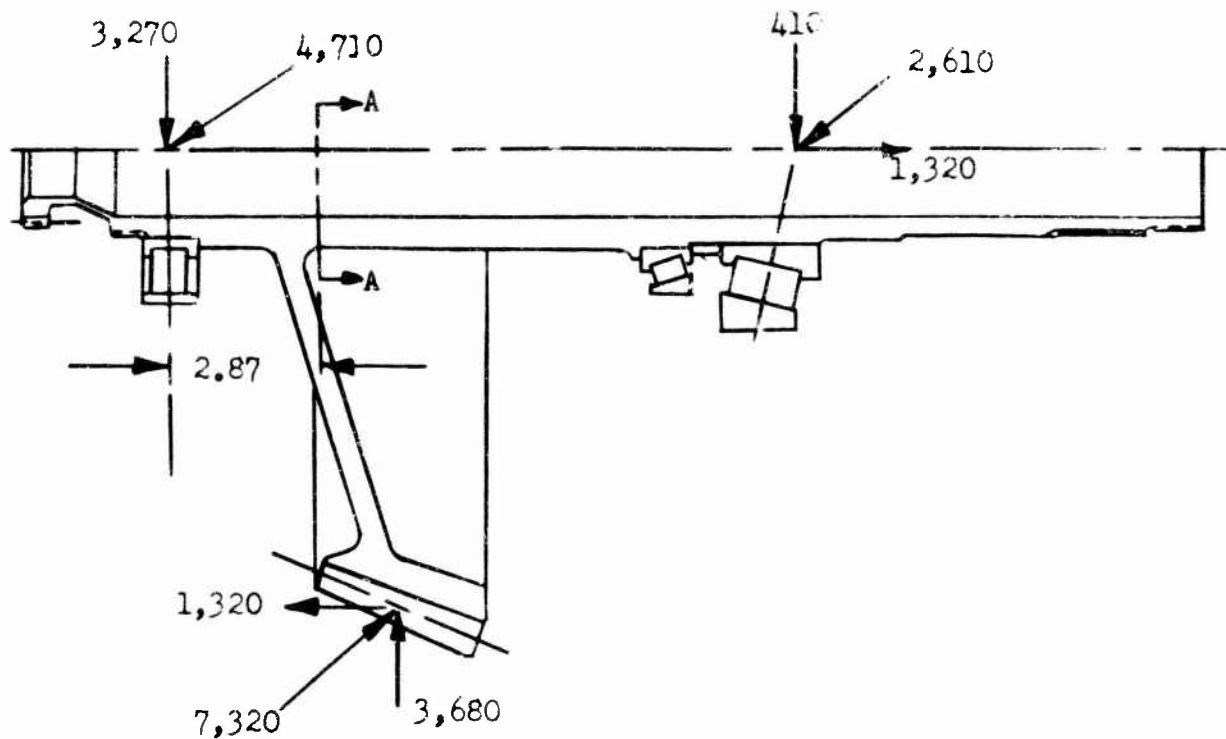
Output Gear Shaft, Engine Reduction Gearbox.
